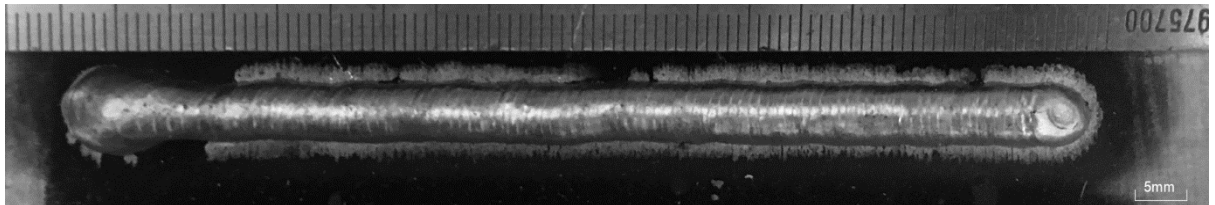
The welding layer with 6.0m/min of feeding wire speed
